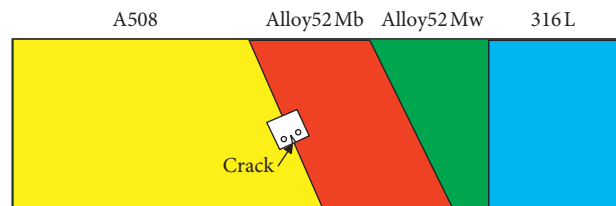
Schematic diagram of the crack position of the dissimilar metal welded joint at the safety terminal.
